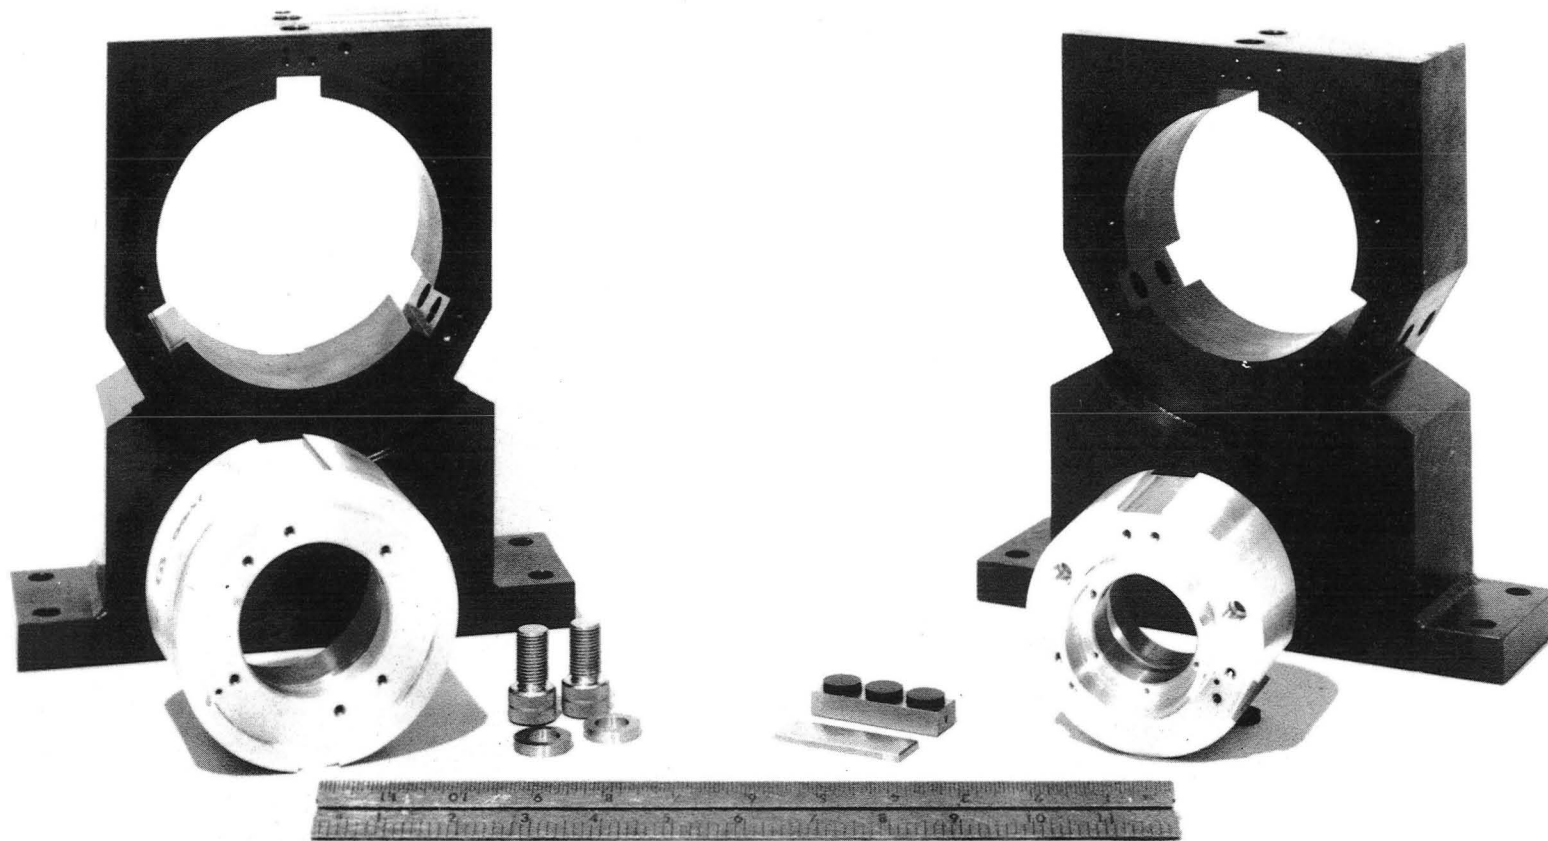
Elastomer Damper Rig, Pedestals, and Bearing Housing
